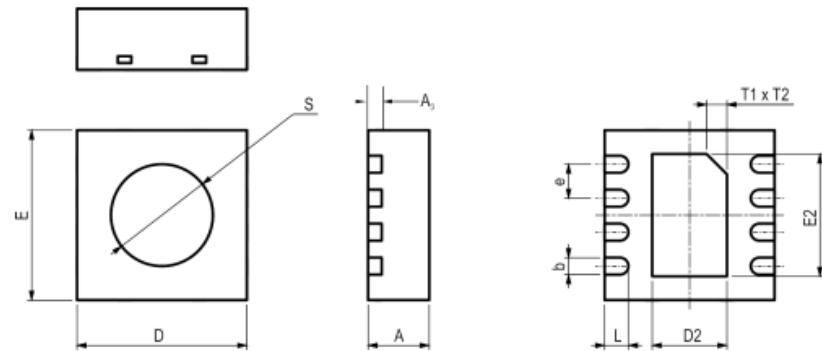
Dimensional drawing of SHT3x-DIS sensor package
